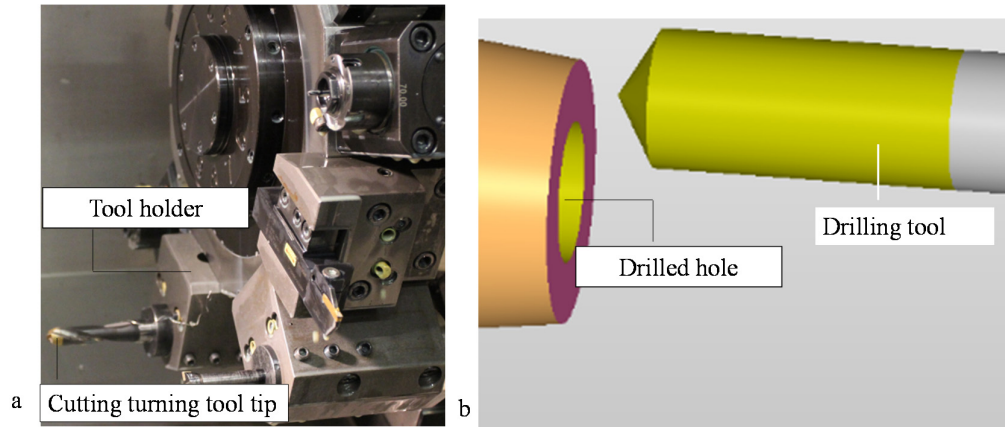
Illustration of (a) drill toolset-up (a) drilling process.
